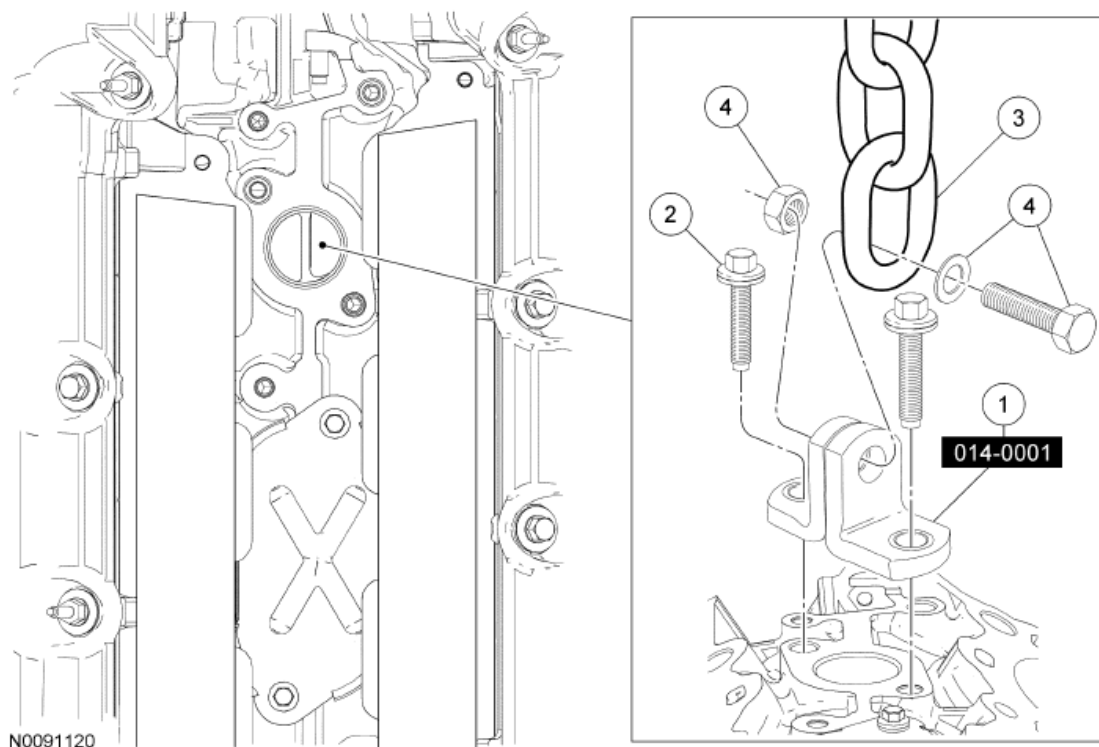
Positioning Universal Adapter Brackets On Top Of Cylinder Block
